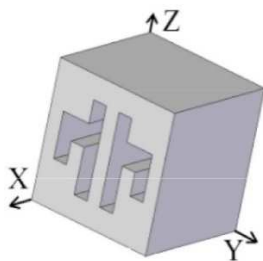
3D model of the ‘cactus’ step gauge [54].
